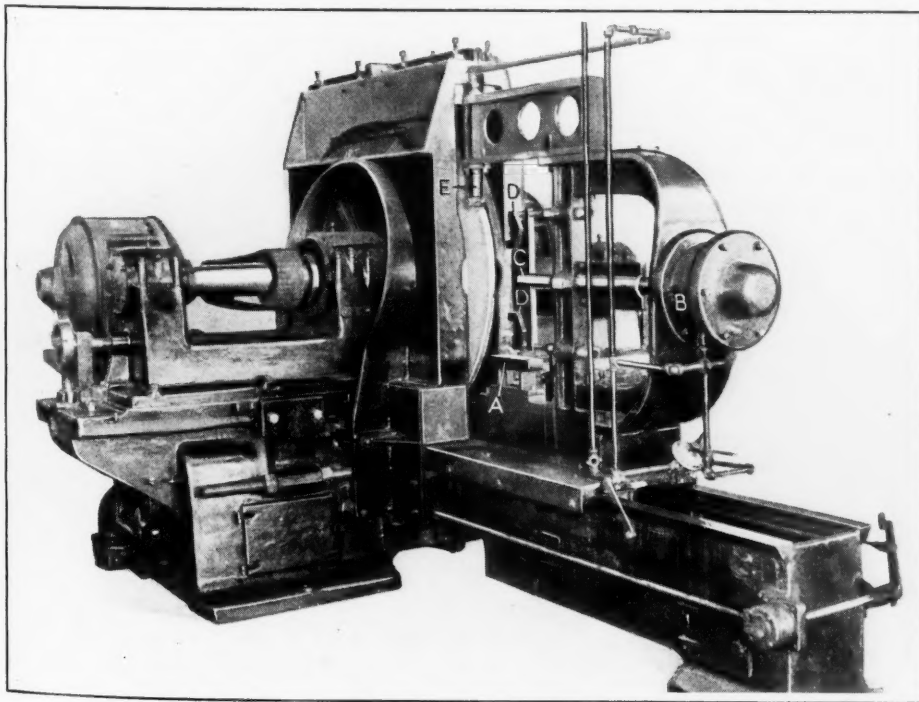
Special Hydraulically Operated Machine Equipped with Two Abrasive Disks for Simultaneously Grinding Both Sides of Boiler Castings
